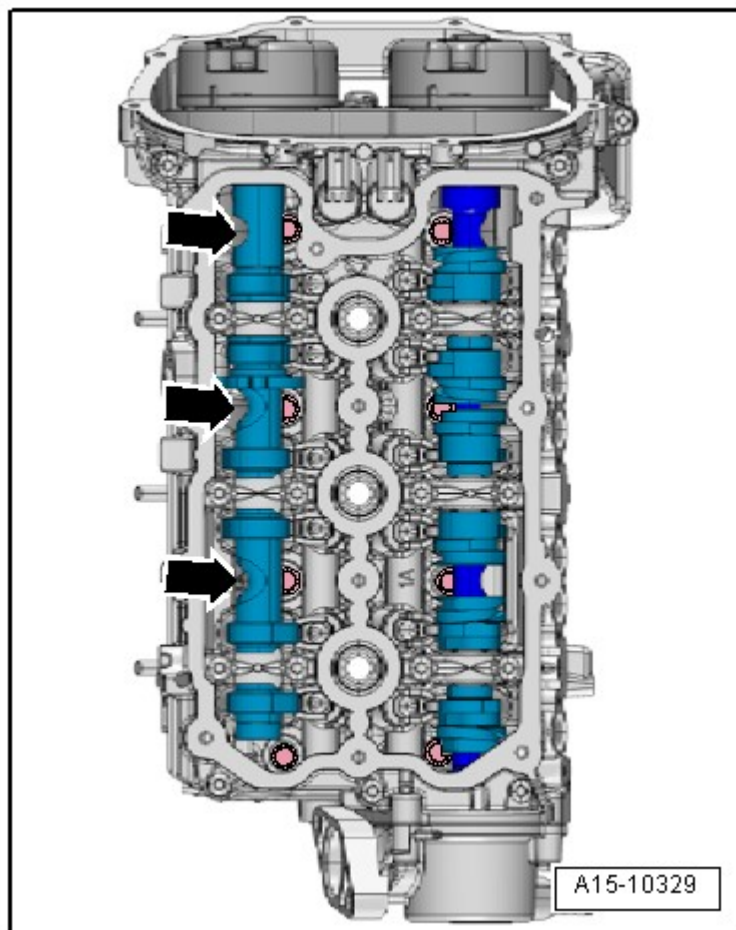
Identifying Exhaust Camshaft Openings Alignment
